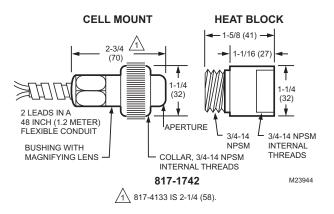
Infrared detector, mounting dimensions in inches (mm).
